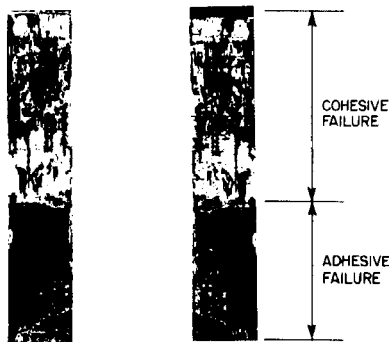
Debonded surfaces of cracked-lap-shear specimen.
